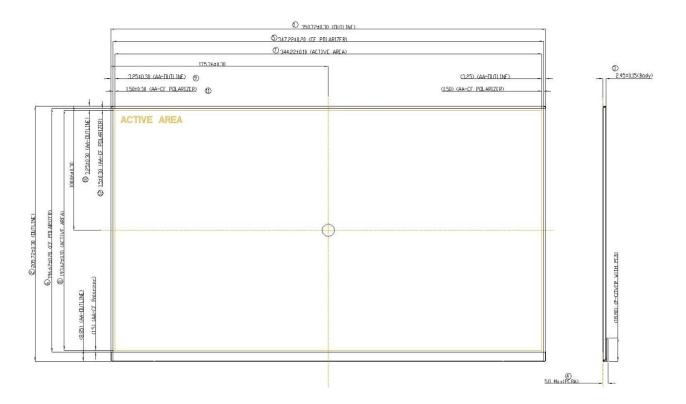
TFT-LCD Module Outline Dimension (Front View)
